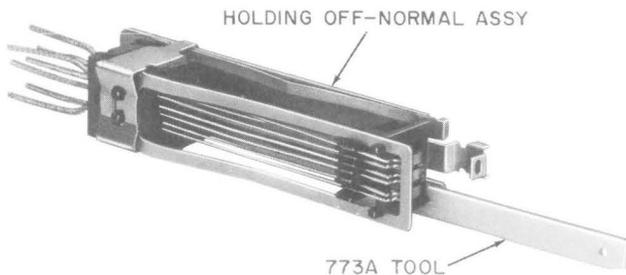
Method of Blocking Holding Off-Normal Assembly
